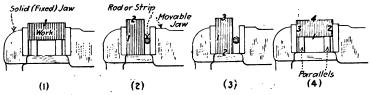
The four successive steps in planing the sides of a rectangular piece.
